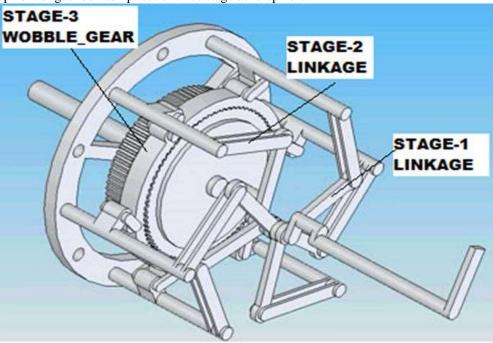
Layout of Three Stage Kinematic Overlay Gear Box
